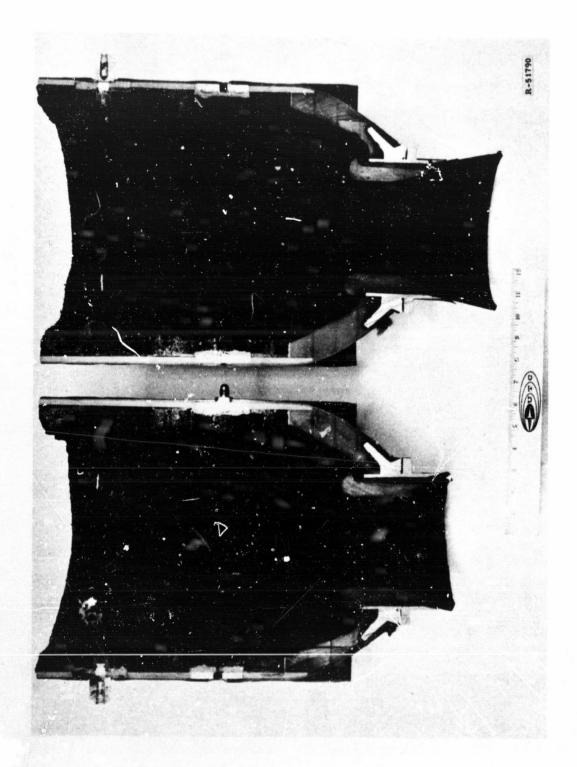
(U) Mixer Assembly From Motor 008 After Test
